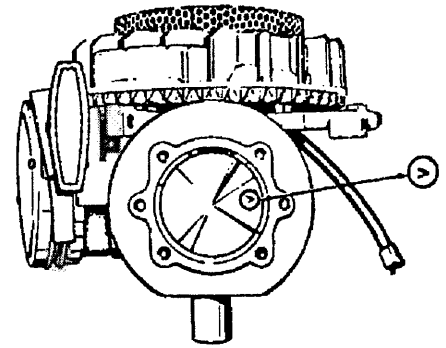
The "V" mark or "1111" mark on top of piston must be toward side shown. Lubrication hole in side of rod must also be toward top.
